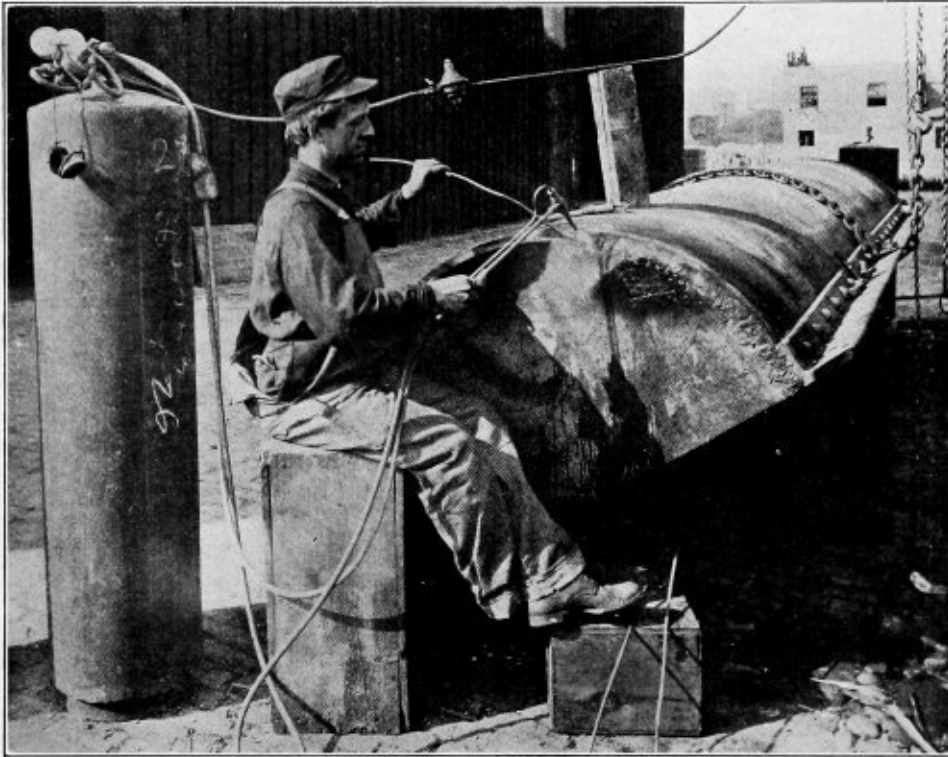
A HEAVY TANK SUCCESSFULLY WELDED BY THE OXYACETYLENE PROCESS.
